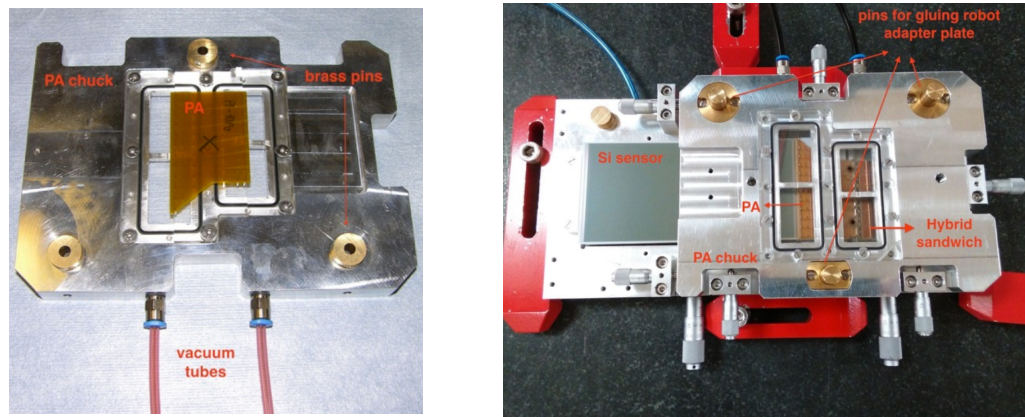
Picture of the pitch adapter positioned on chuck (left) and of its positioning over the gluing jig (right).
